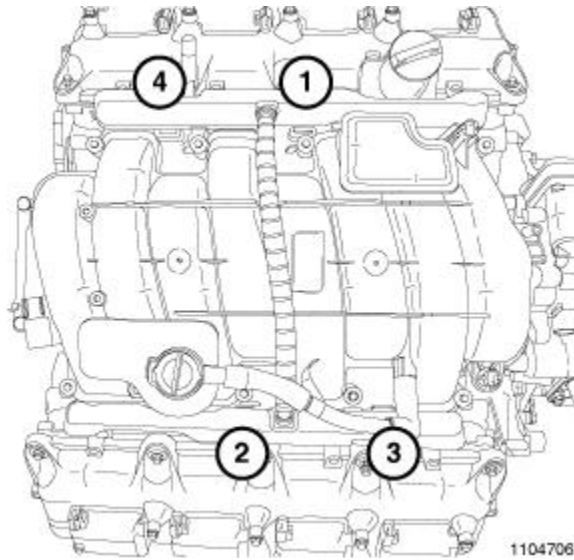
Fuel Rail Mounting Bolts Tightening Sequence
